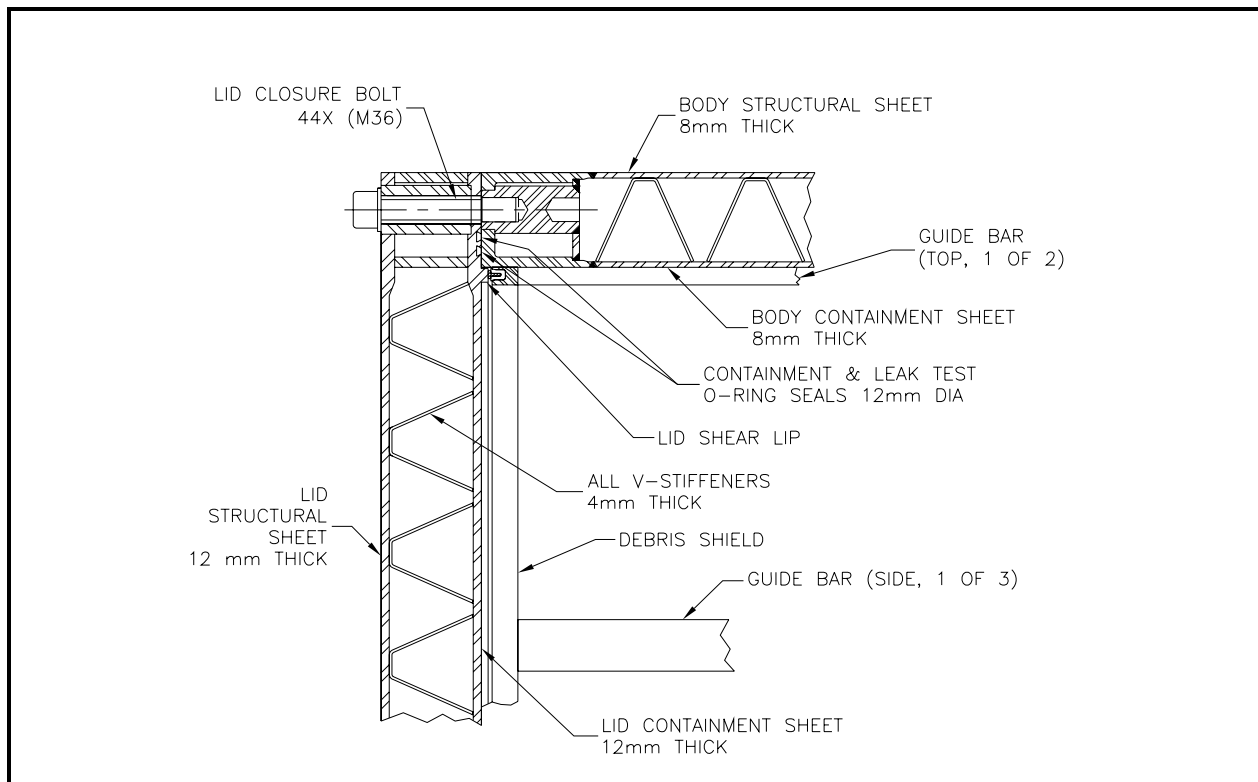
TRUPACT-III Packaging Closure Lid/Seal Flange Details
